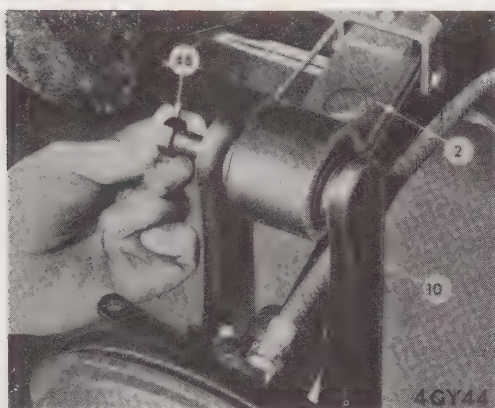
14 Removal of spring-eye bolt when detaching spring.
